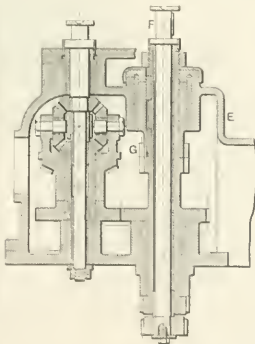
Gearing provided to give Required Lead for Worm Thread
